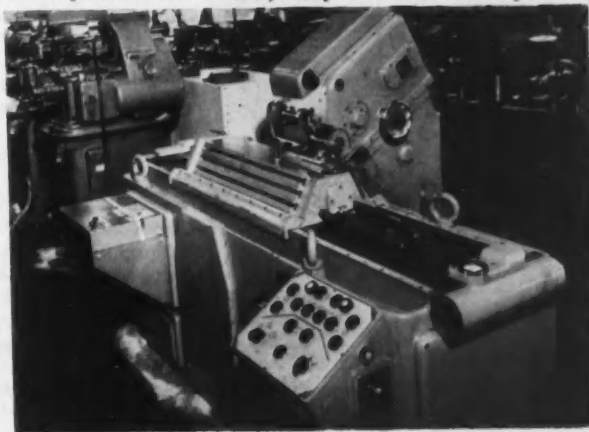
Single-headed Koepfer rack-cutting machine. The Creed tape unit is on the left
